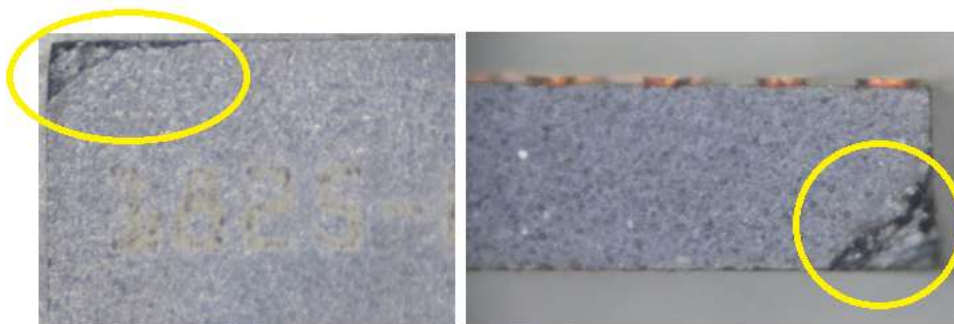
Actual units with package chip out defects after 100% Visual inspection.
